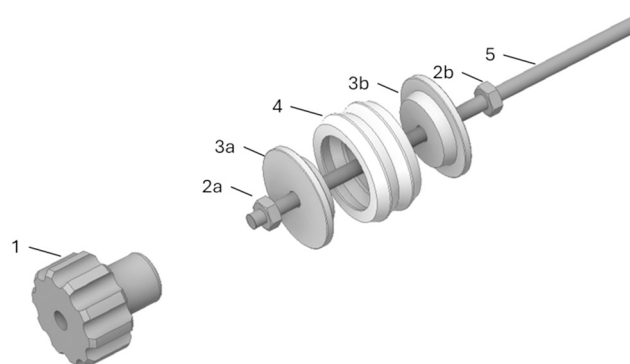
Construction of the biofilm-removal tool (1 nut tightening tool, 2a + b nut, 3a + b plastic washer, 4 double piston, and 5 threaded rod).
